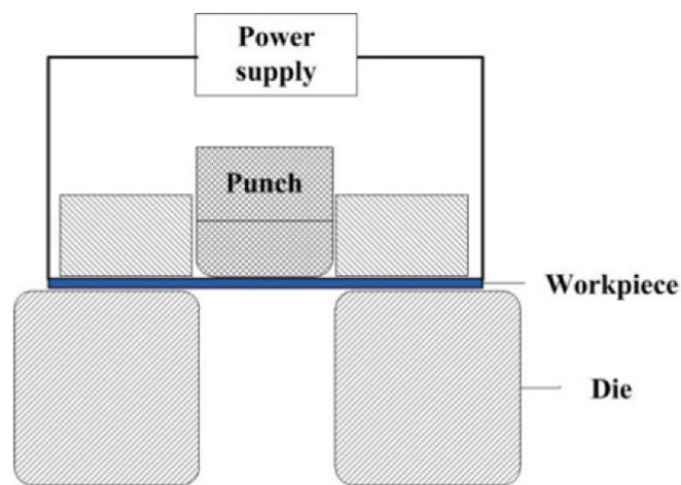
Schematic of an electrically assisted deep drawing process [122].
